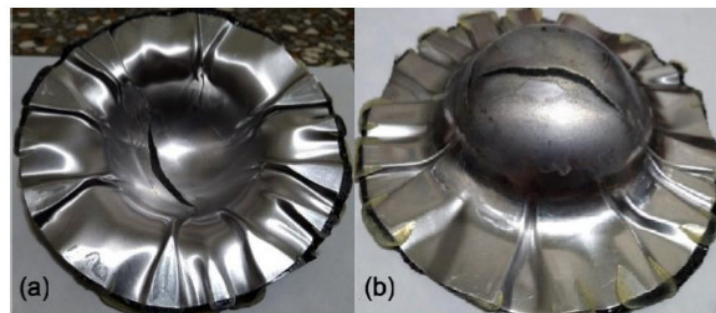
Deep drawing of Al 6061-composite sandwich: (a) front view, (b) back view.
